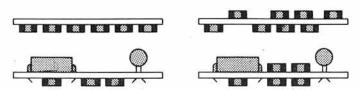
Surface-mounted components can be mounted on or below the printed circuit boards
